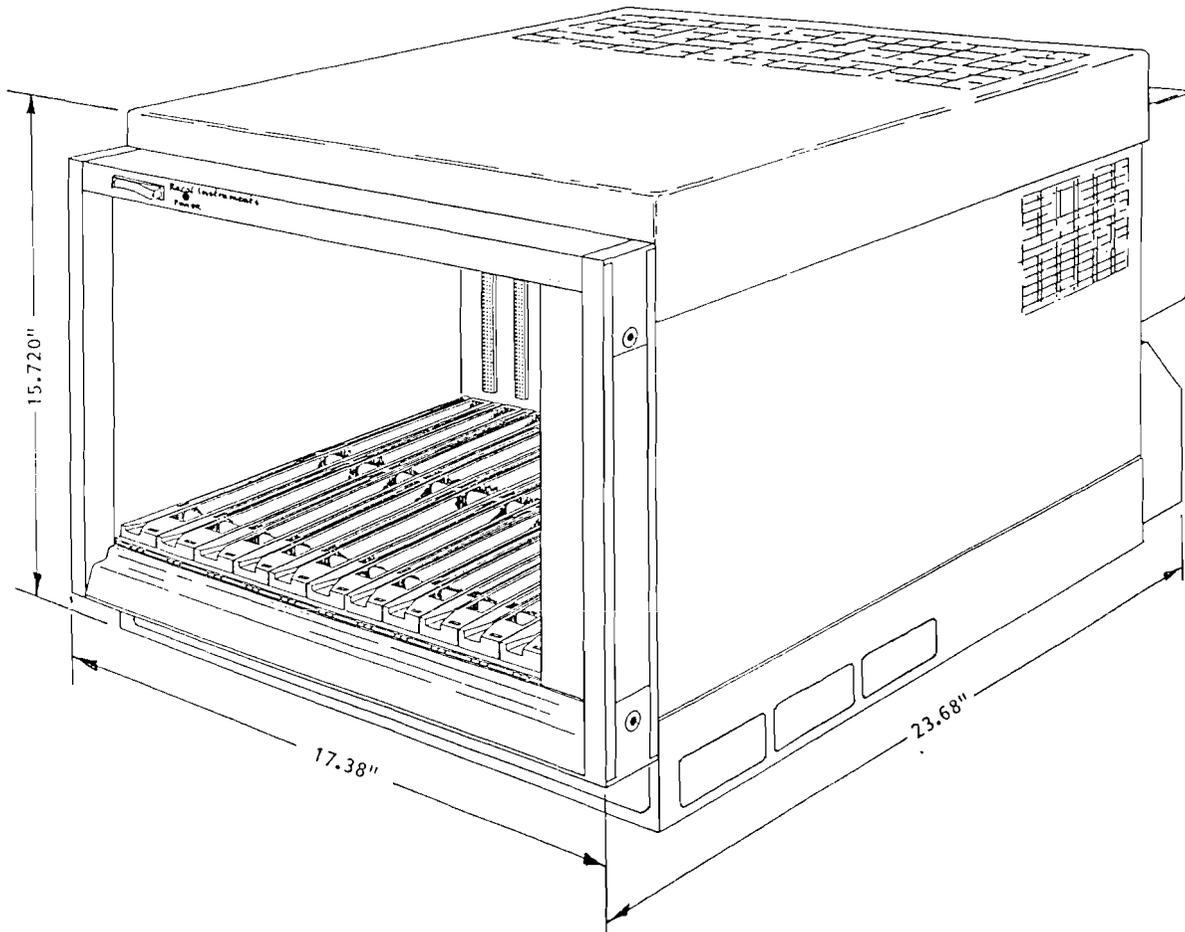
1261B Rack Mount (9U Tall) Mainframe, Plug & Play
